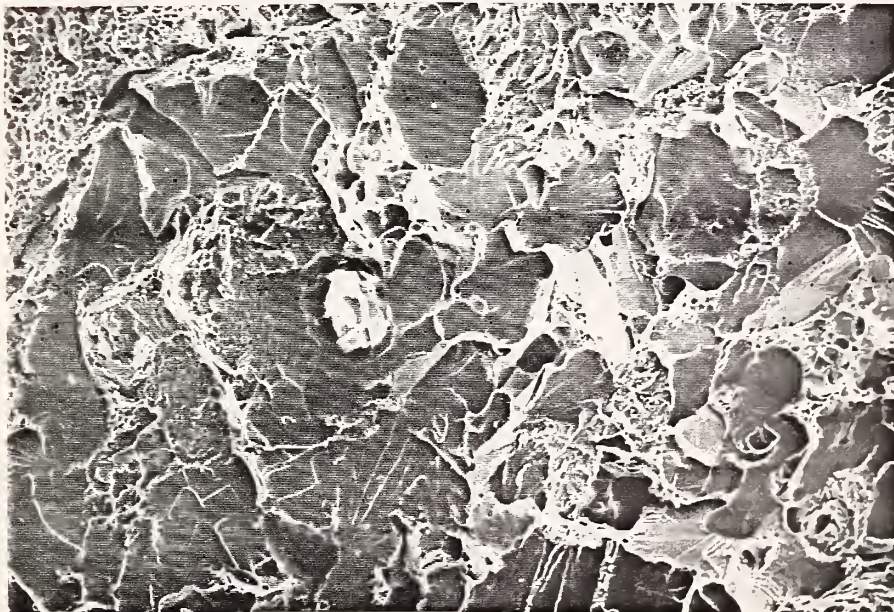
Fracture surface features observed near the center of a weld 13 Charpy V-notch specimen. Similar features were observed in this area for the other welds.
